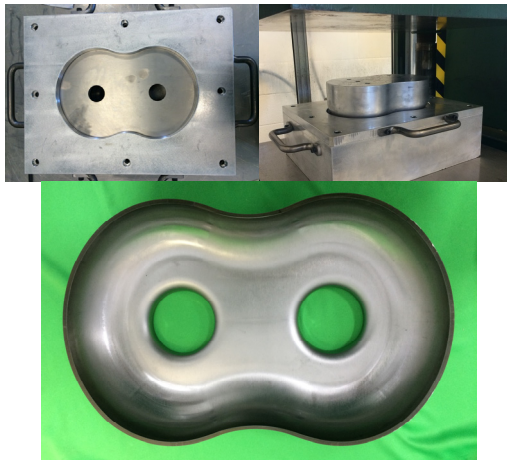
Nb blank placed in the die (top left), die set under press (top right) and stamped half cell (bottom).
